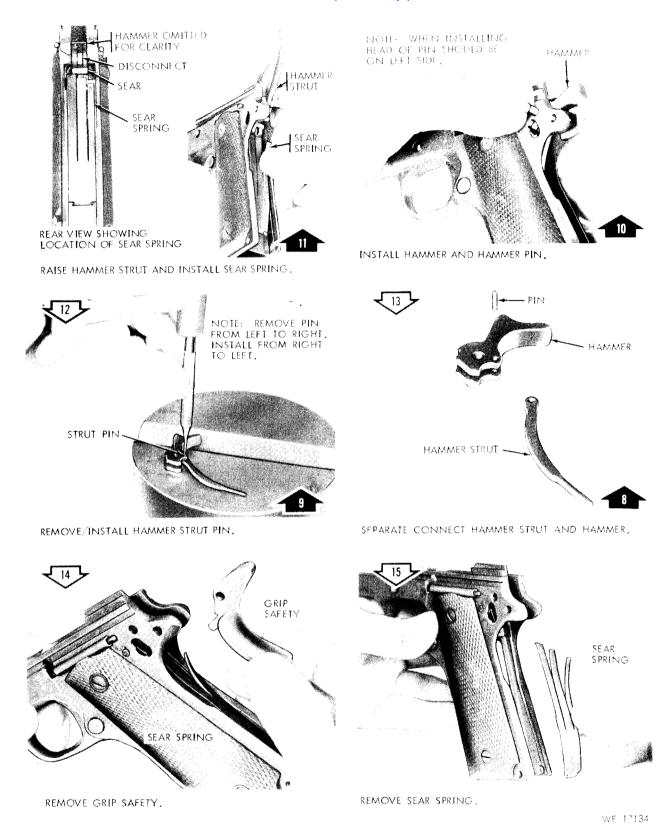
Organizational disassembly/assembly of Caliber, 45 Automatic Pistol, M1911A1. (4 of 6)
